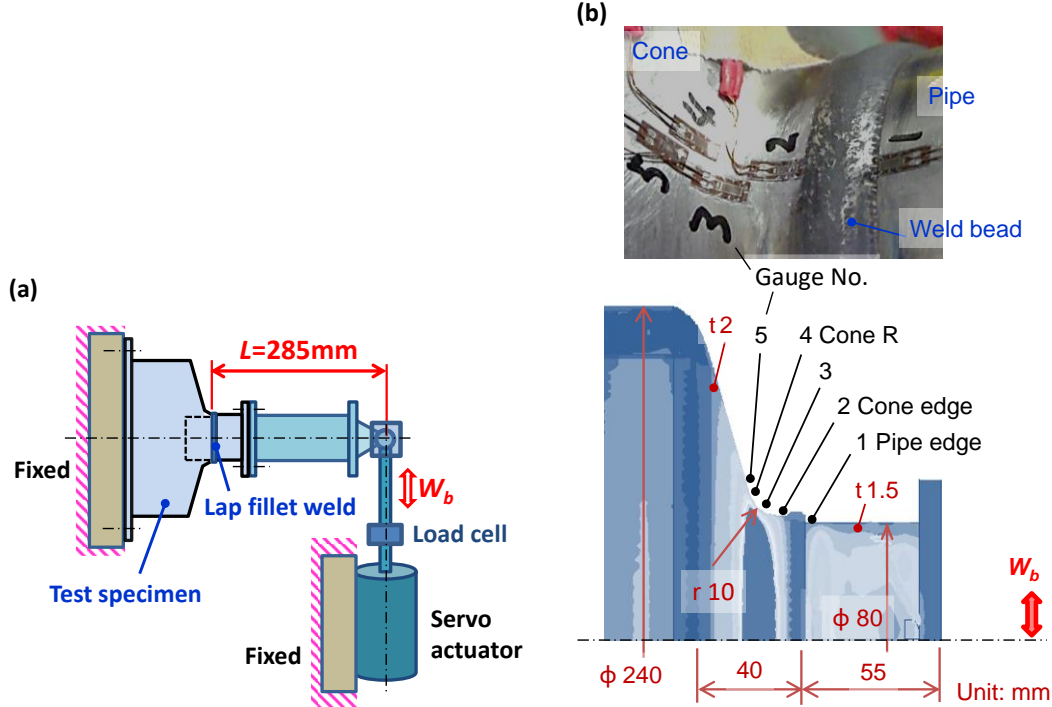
Outline of the fatigue test for bending load in (a), and specimen dimensions and strain gauge positions in (b).
